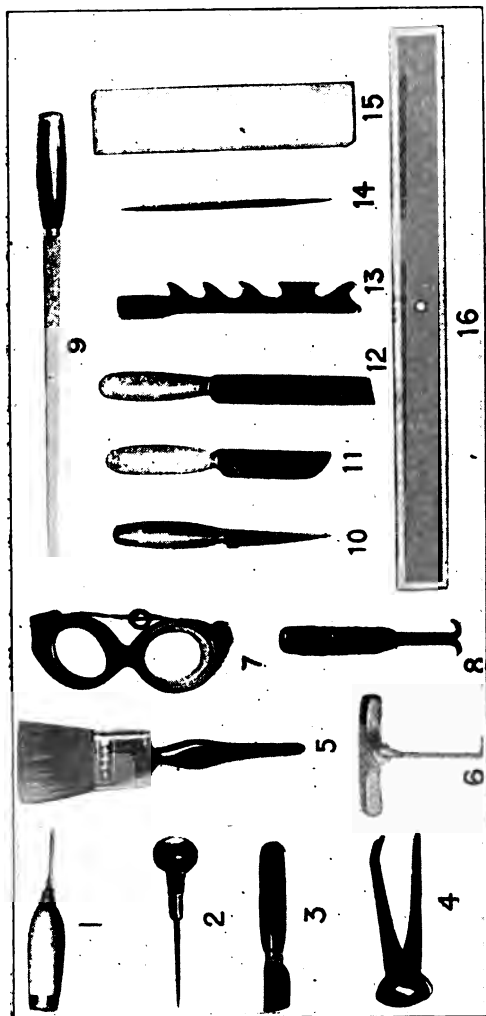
Cutting down tools. 1—locating awl. 2—fabric awl. 3—notched knife. 4—pinchers. 5—brush. 6—tread gauge. 7—goggles. 8—fabric hook. 9—prodding tool. 10—skiving knife. 11—tread knife. 12—rubber knife. 13—spreader. 14—small file. 15—sand stone. 16—steel rule.
